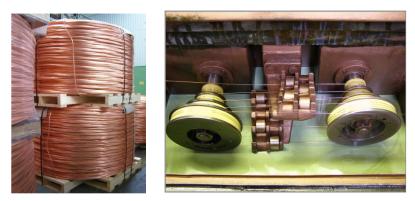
a) Purchased bundle of copper wire, b) Wire drawing concept.
